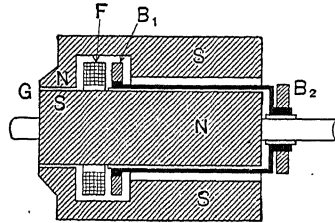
Drum type of unipolar machine with revolving magnet core and auxiliary cylinder gap, section.
